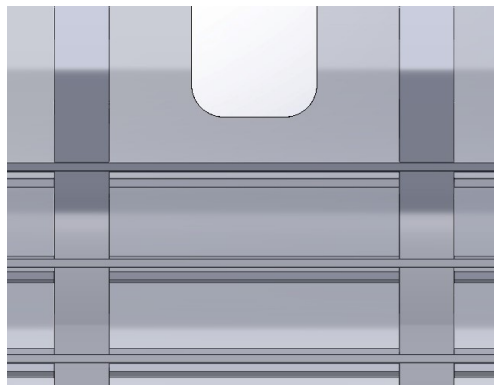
Fuselage Structural Layout Showing Frame and Stringer Pitch
